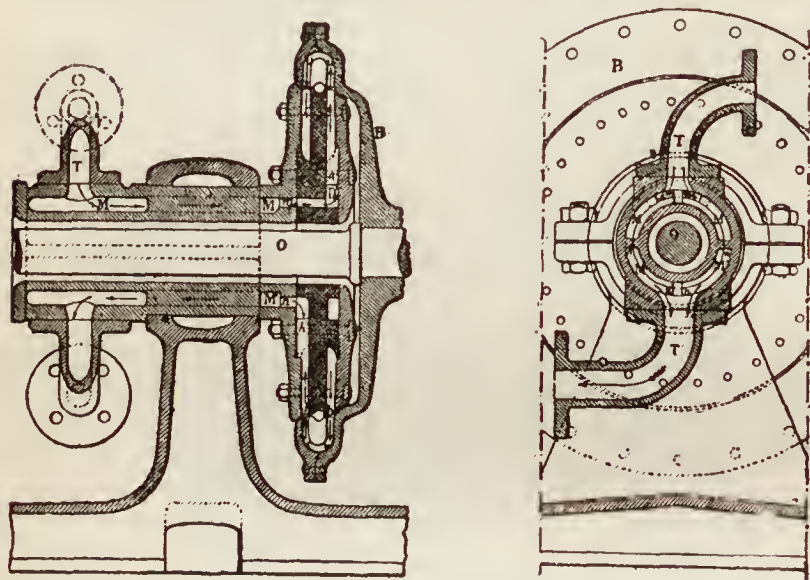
LONGITUDINAL AND CROSS-SECTIONS AT THE STEAM AND EXHAUST PIPES OF THE DUMOULIN TURBINE.
